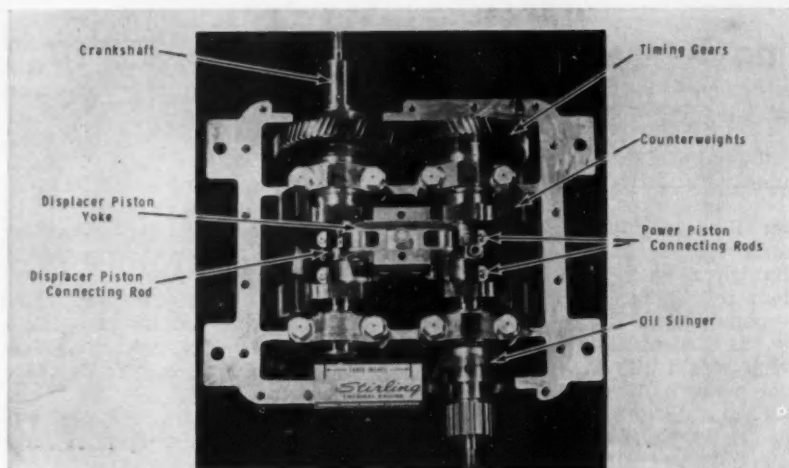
Rhombic drive mechanism, which controls motion of pistons. (View with crankcase cover removed.)
